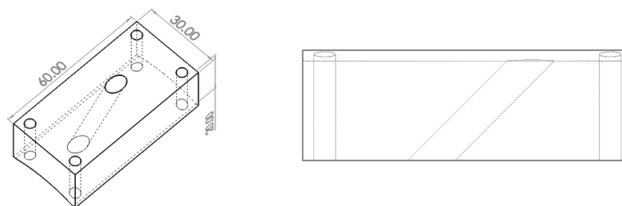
Drawing of 3D-printed part for keeping the sampling tube in a 45° angle. Printed twice and fastened at the ventilation tubes close to the model inlet and outlet.
